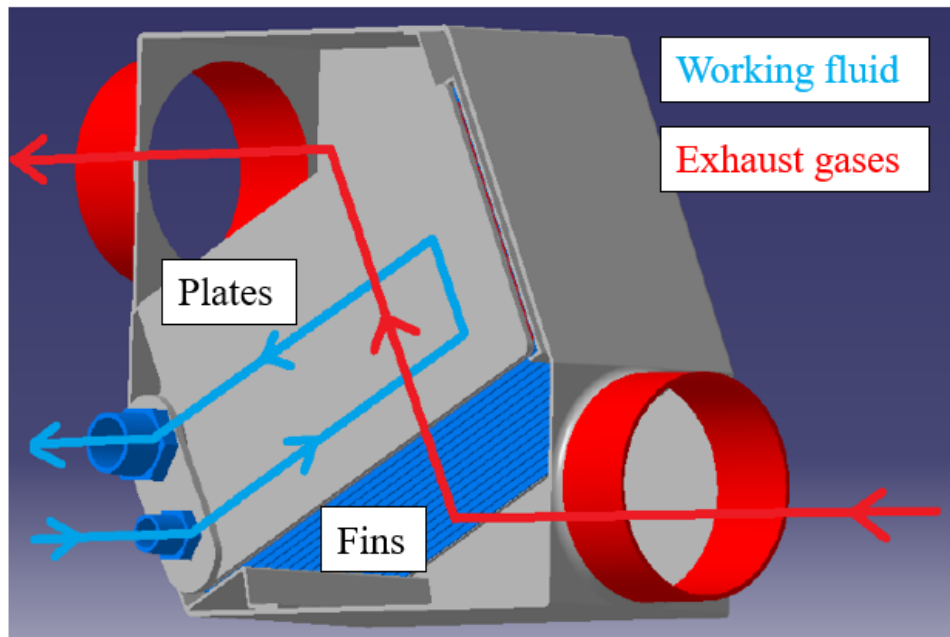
3D cad model of the plate and fins evaporator with details on hot and cold side fluid passages.
